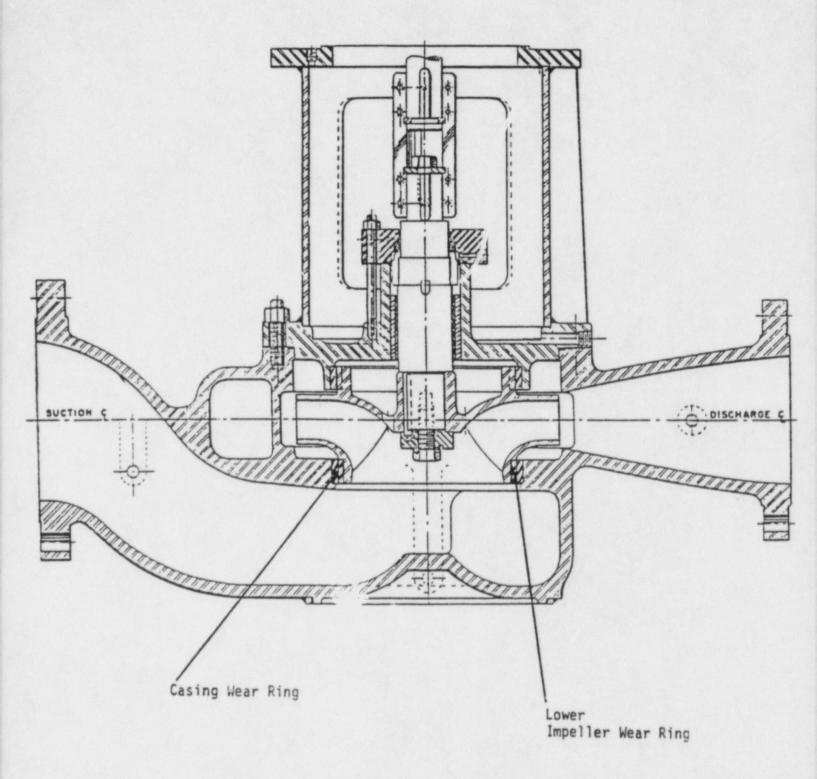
Sketch of typical CVIC RHR pump sectional assembly, showing locations of impeller and casing wear rings.
